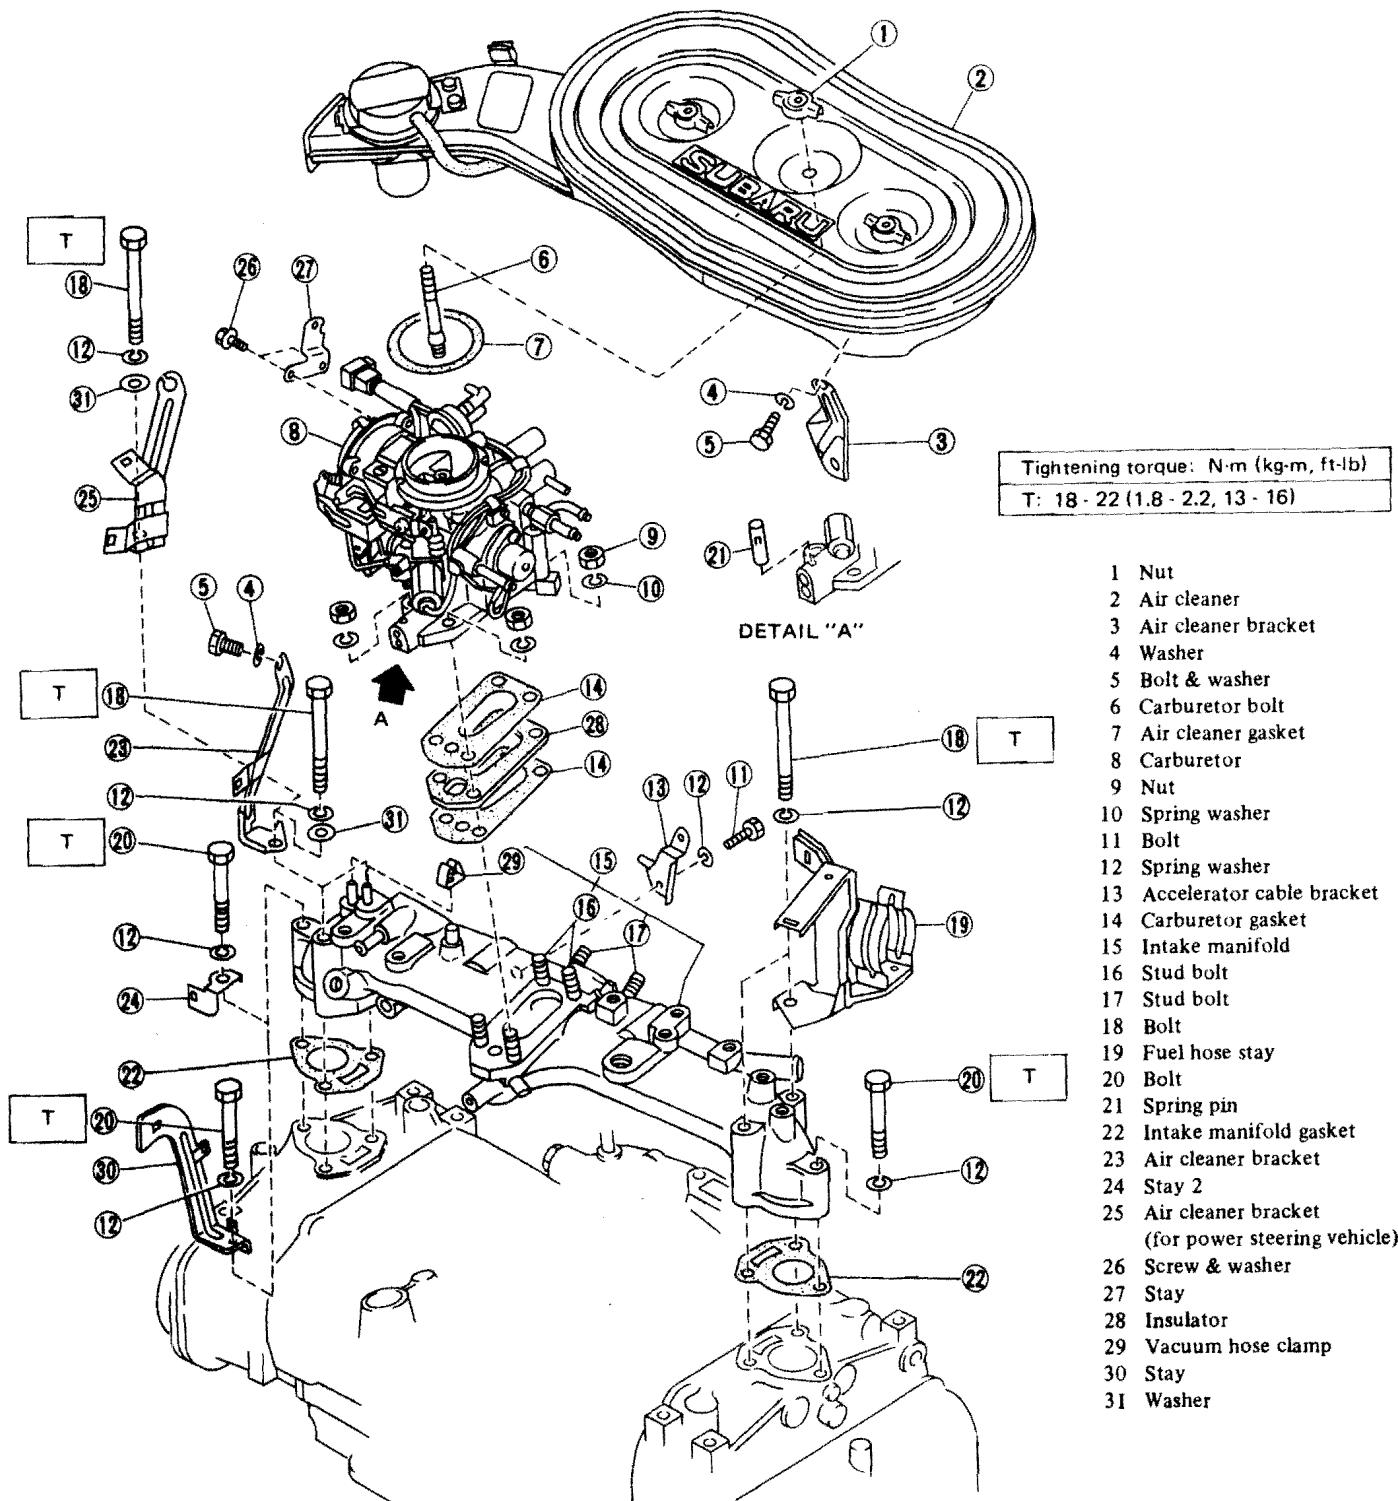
Intake manifold (Hitachi carburetor type)
